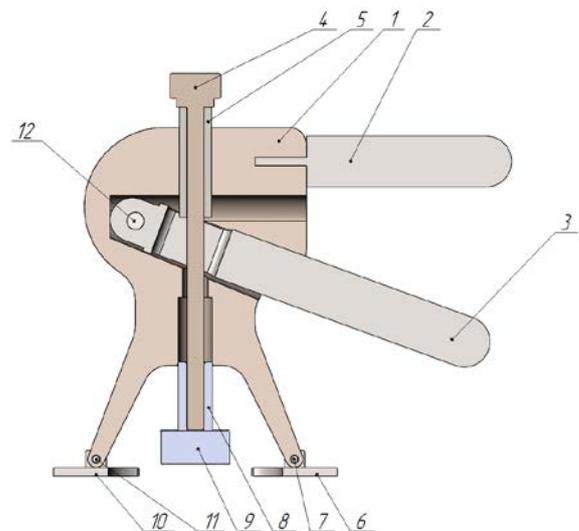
Minilifter internal design: 1 – body; 2 - fixed handle; 3 - movable handle; 4 -control bar; 5 – control clutch; 6, 10 - support points; 7, 11 - fixing screws; 8 - hold-down mechanism; 9 – magnet; 12 - grub screw
